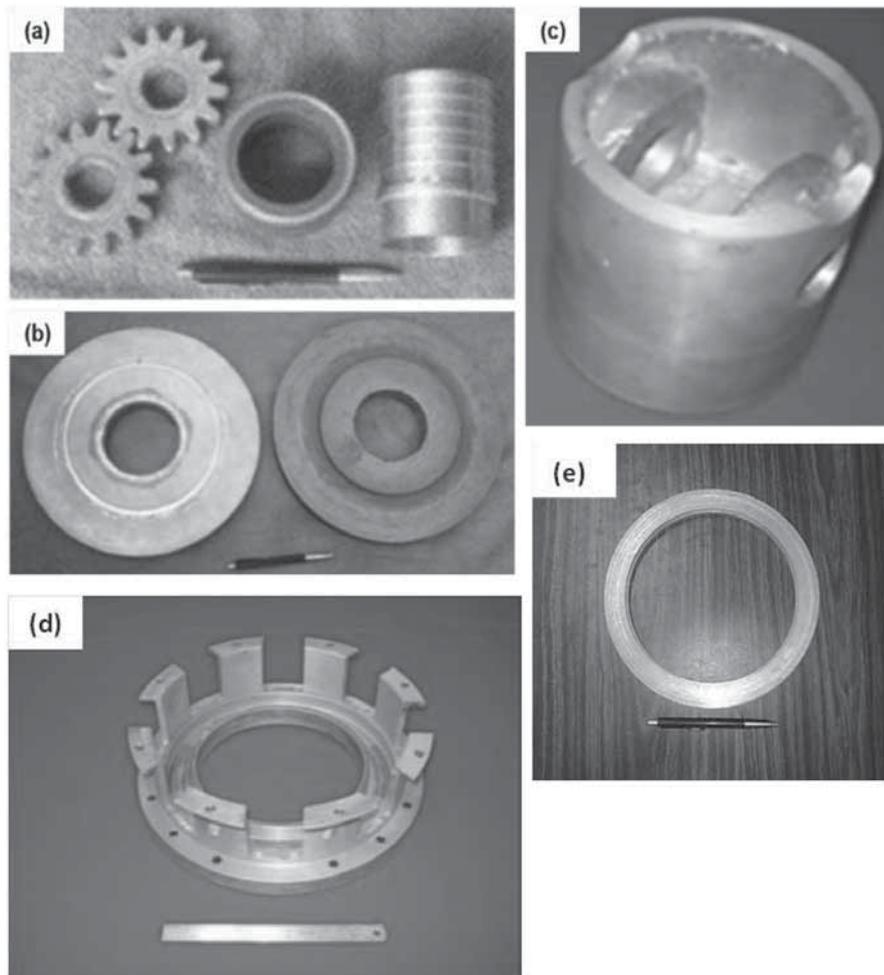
Functionally graded aluminium matrix composite prototype components at CSIR-NIIST (a) cylinder liners and gears (b) brake rotor disc (c) piston for engineering application (d) Al (356)-15%SiC metal matrix composite first gear housing and (e) piston ring processed by liquid metal stir casting and shaped by sand casting¹⁹
